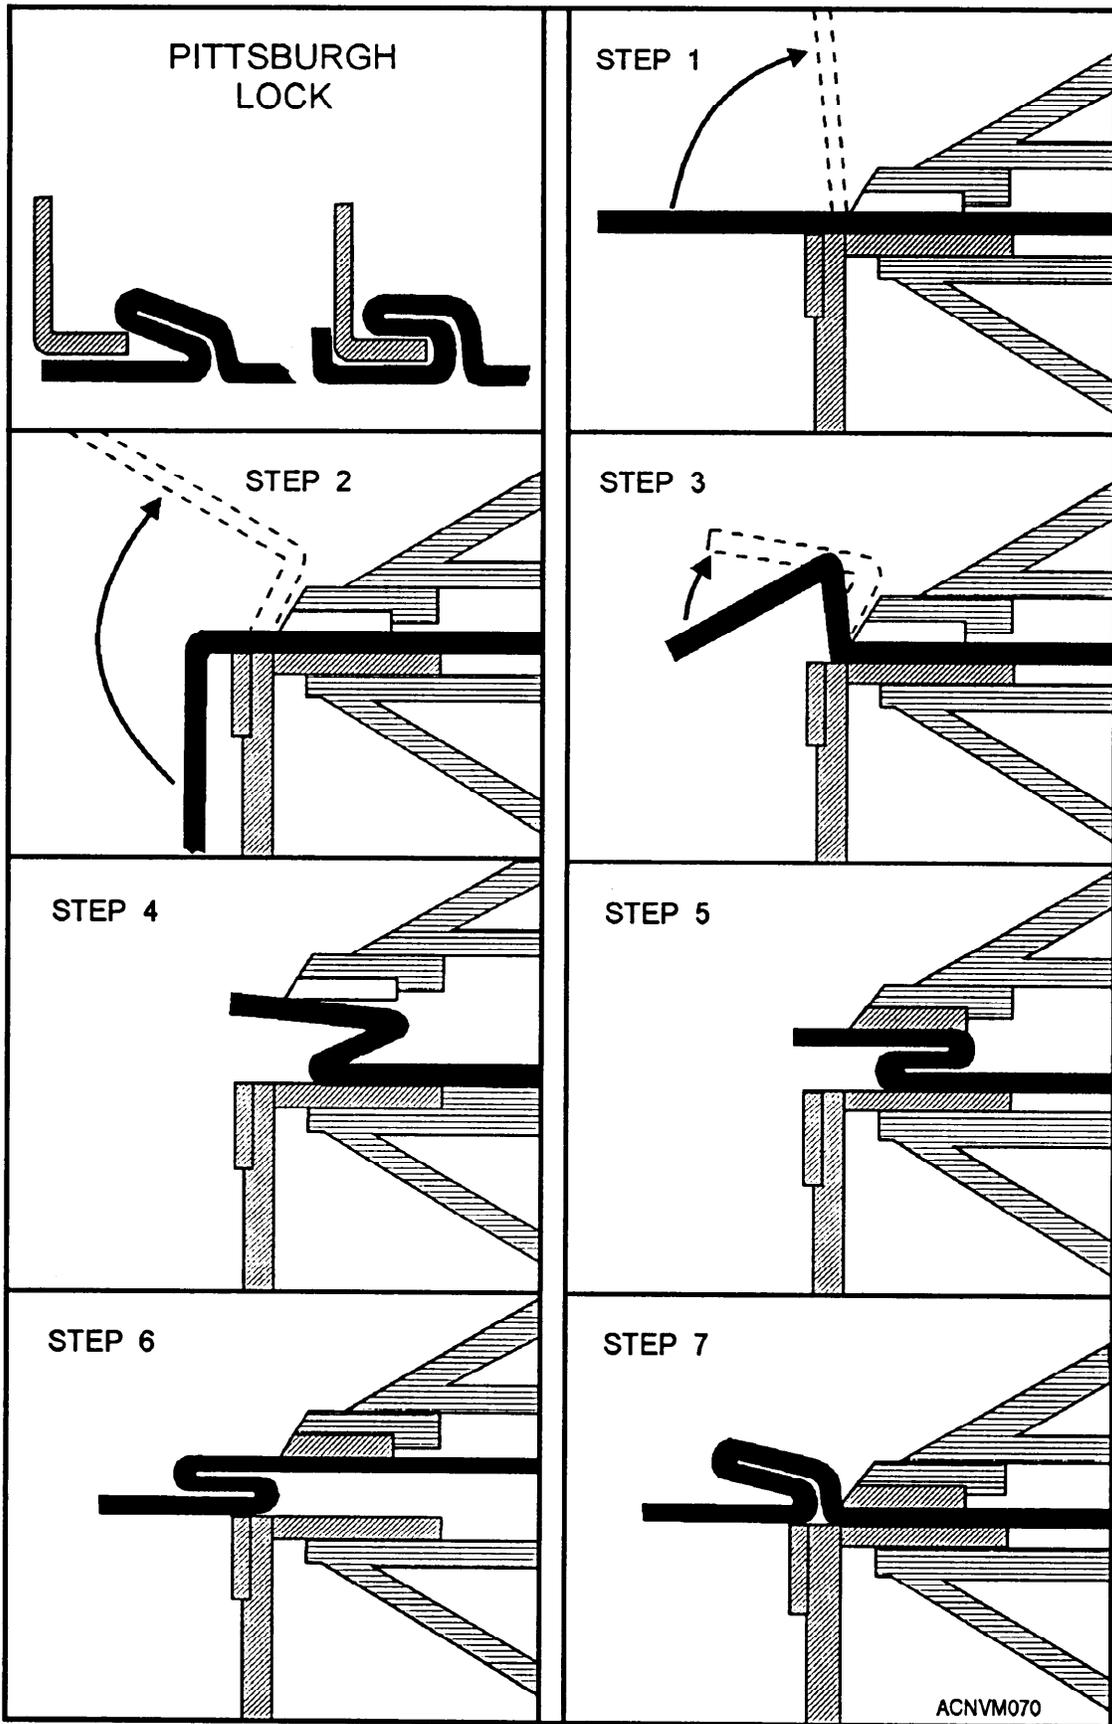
Some steps in forming a Pittsburgh lock scam.
